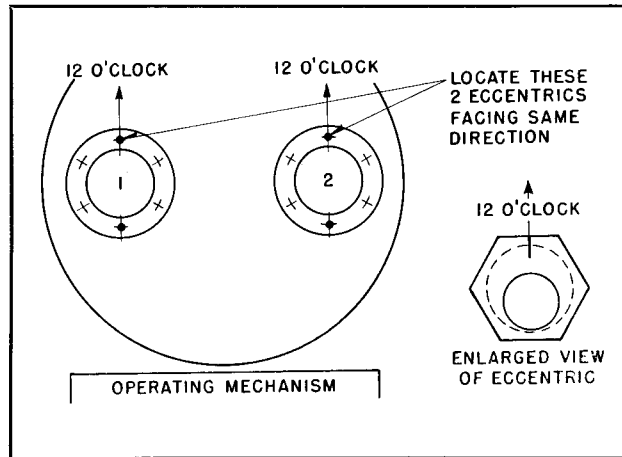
Eccentric Locations for 115 and 138 Kv. Breakers
